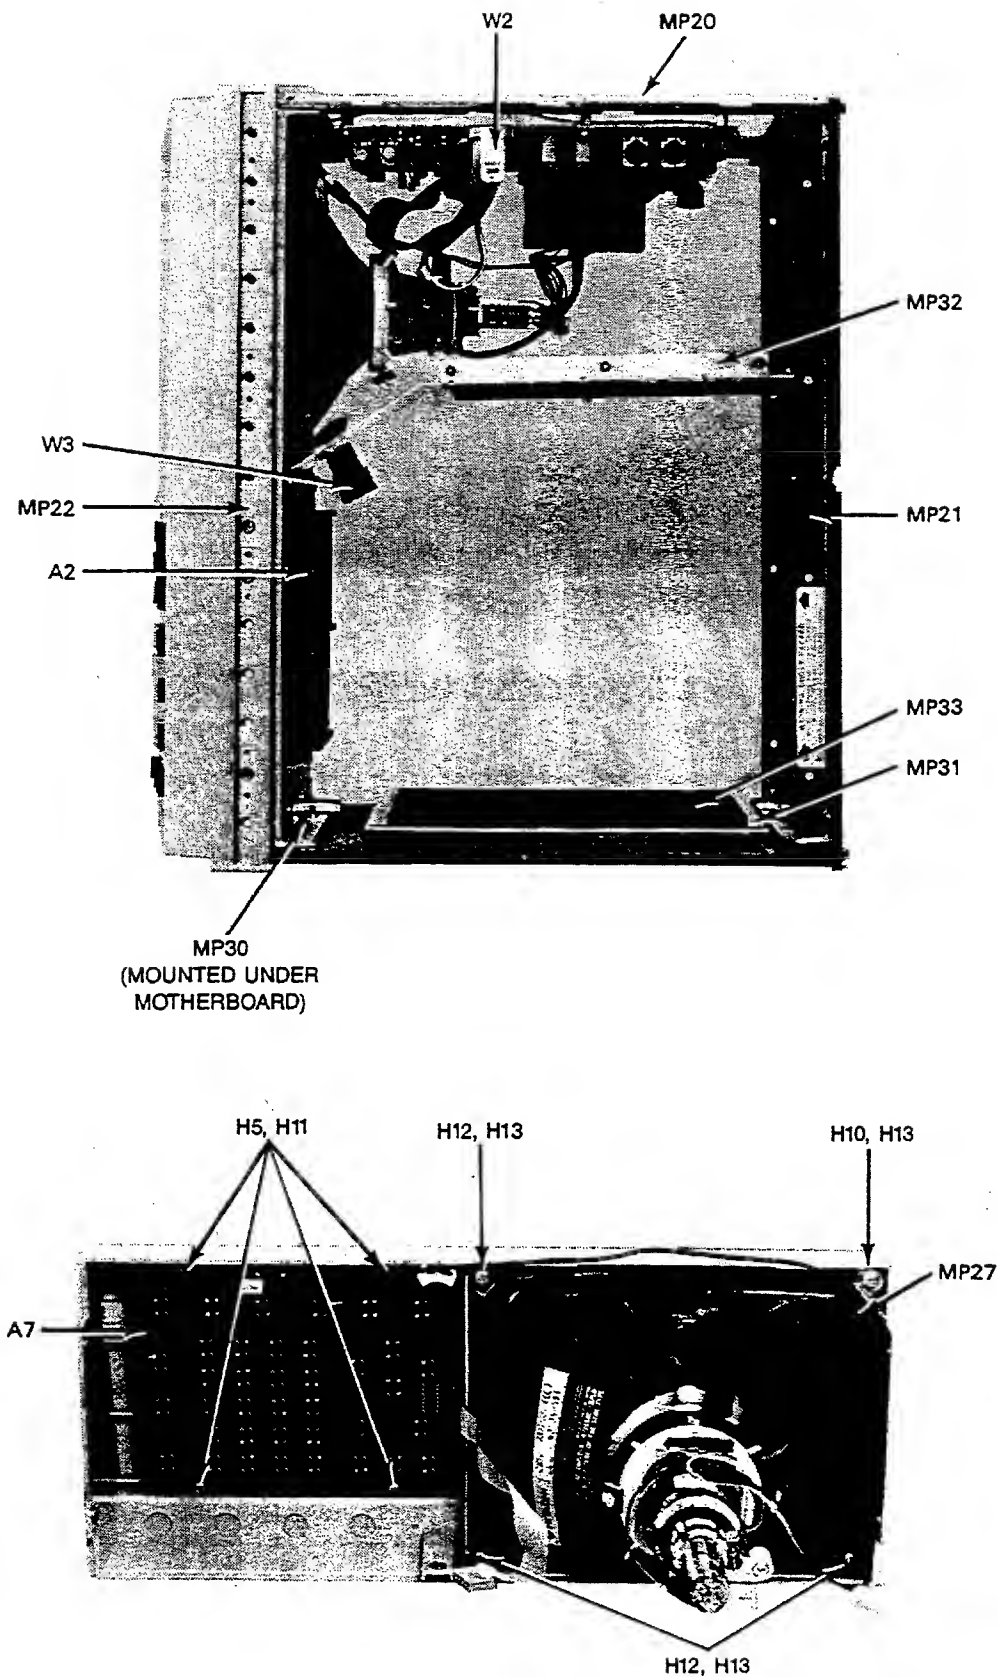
Mainframe Mechanical Parts Locations (sheet 4 of 4)
